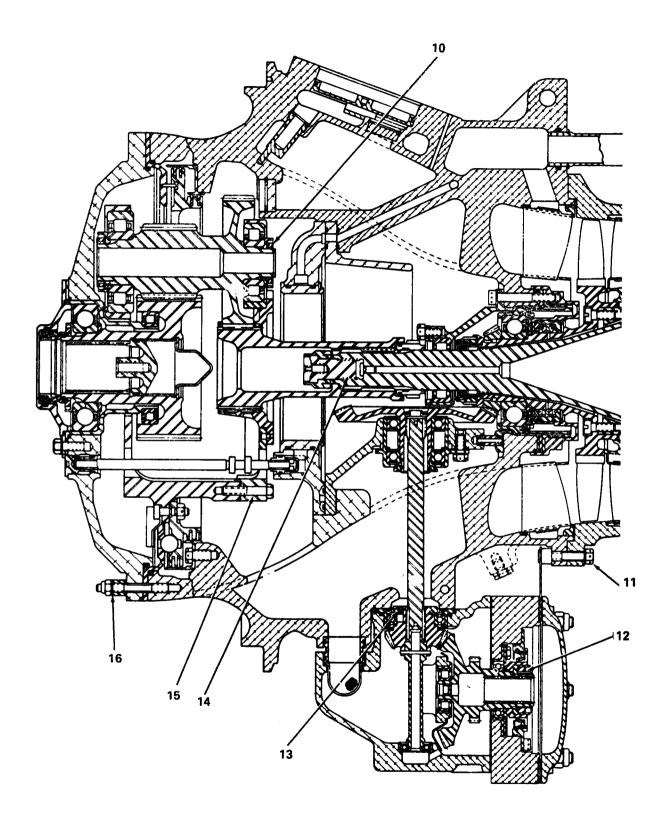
Special Torque Value Locations (T53-L-11 Series Engines) (Sheet 2 of 6)
